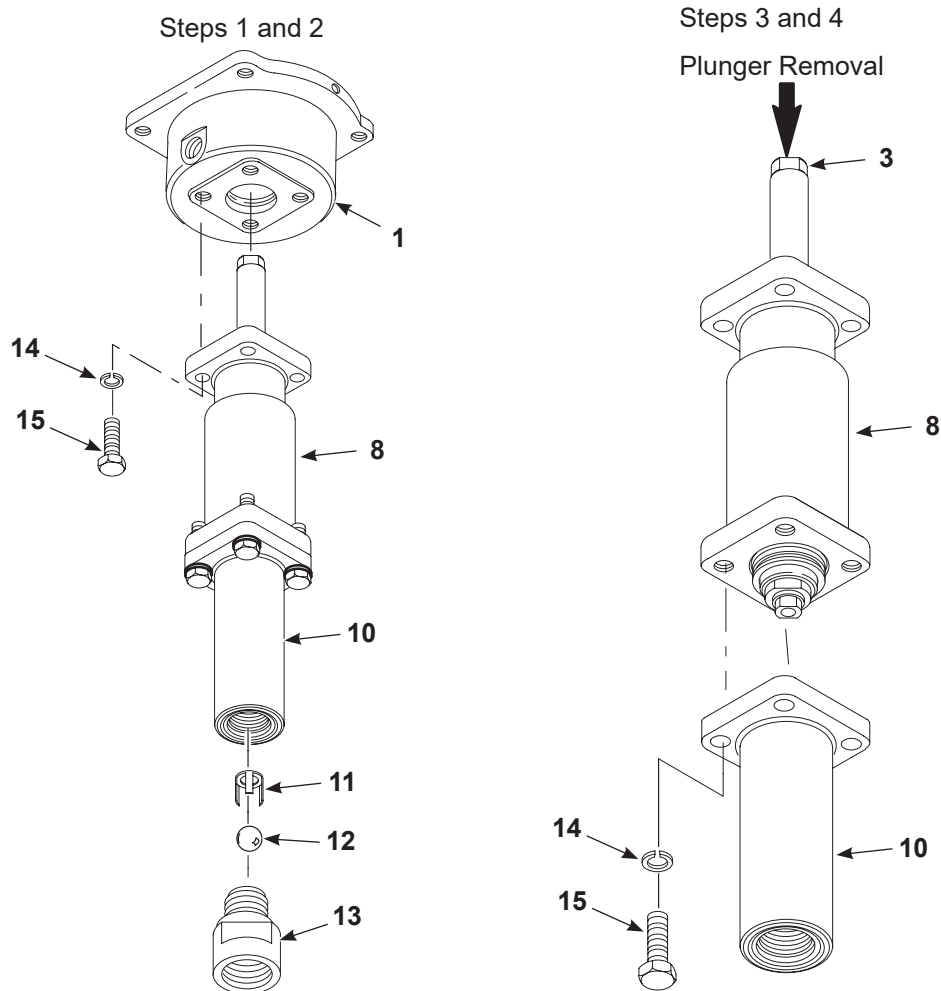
Hydraulic Section Disassembly—Steps 1, 2, and 3
